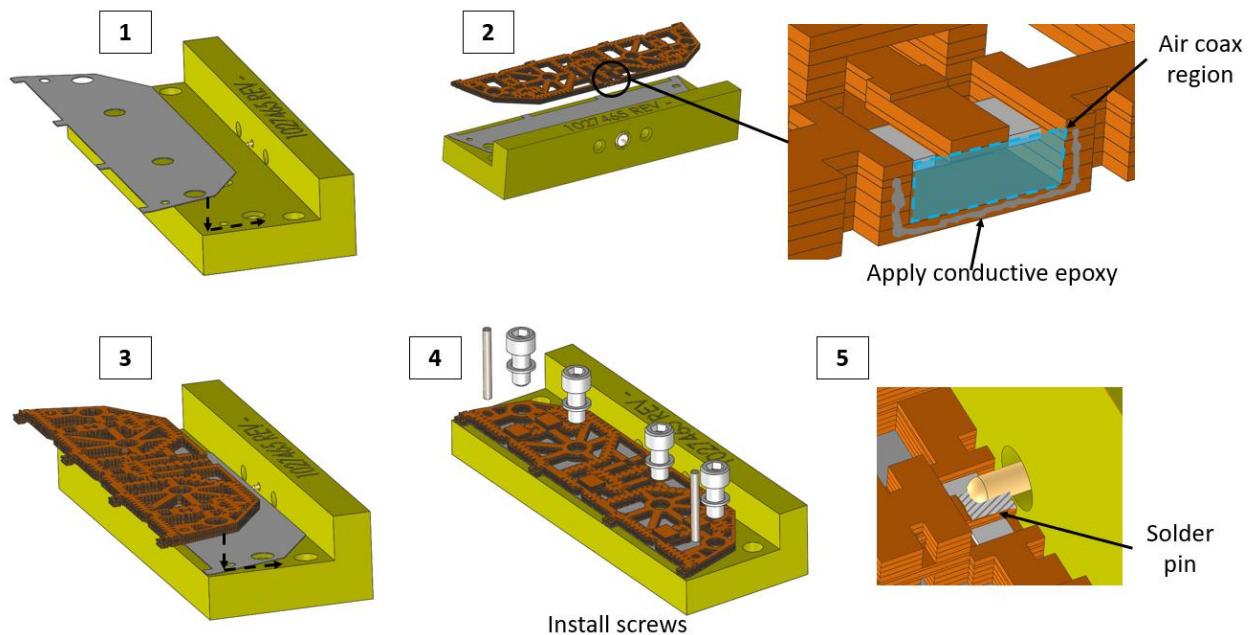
Coaxial Output Connection Assembly Steps 1 through 5
